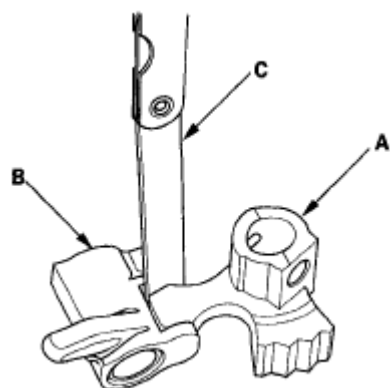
Measuring Clearance Between Shift Arm And Shift Piece
